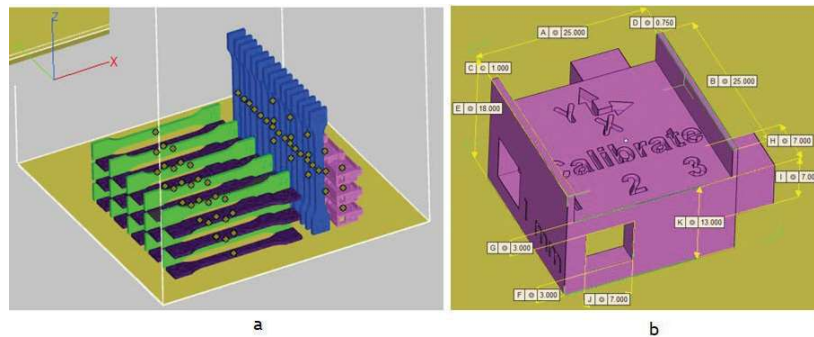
CAD geometry and arrangement of the test pieces in the building chamber (a) and the details of the test block for dimensional accuracy (b)
